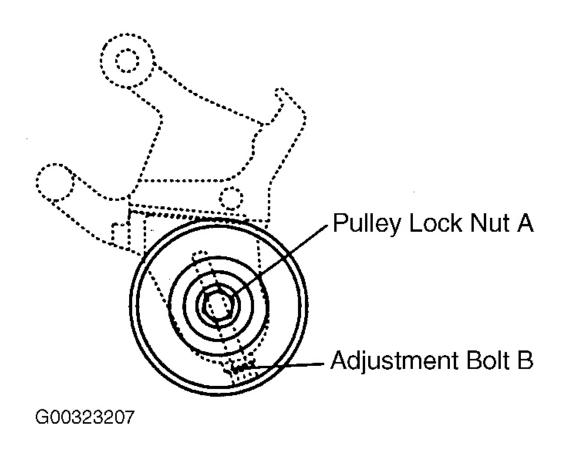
Adjusting Alternator & Air Conditioning Compressor Belt Courtesy of KIA MOTORS AMERICA, INC.
